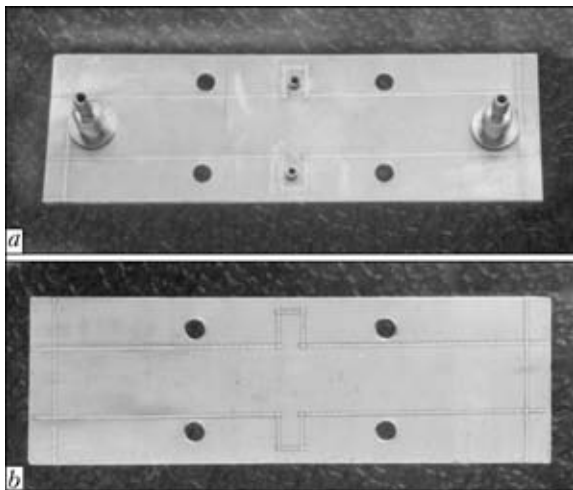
Measuring chamber of gas analyzer with straight-line overlap welds ($\times 1$): *a* – appearance on the side of nipples and exhaust pipes; *b* – on the side of lower plate
